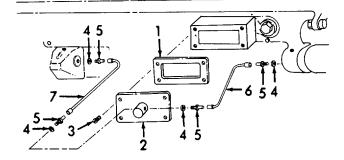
Lower (Bed) Lubricating Oil System, Installation.
